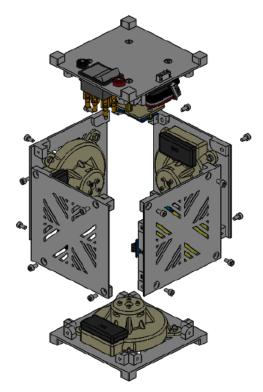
Exploded view of the cubesat with 3 reaction wheels assemplies, battery pack (upper face) and control board.
